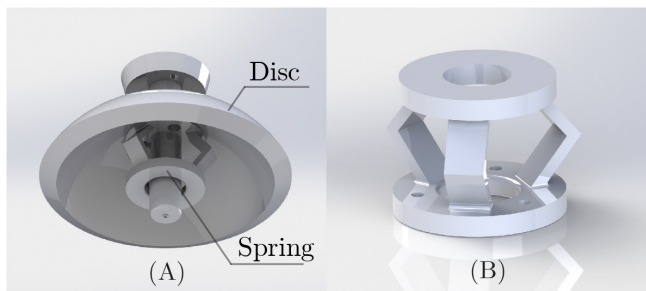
Joystick control design. A) 3D drawing bottom view of the non-assembly joystick design. B) 3D drawing of the spring.
